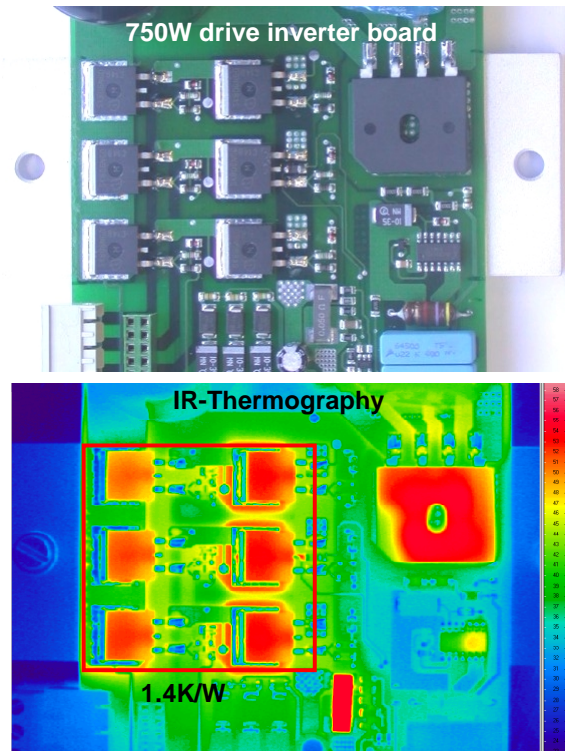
A 750W drive inverter board with on-board power stage. Bottom: Thermography under nominal load.
